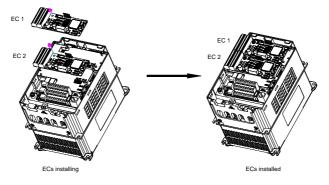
5.5 kW and lower VFD models with extension cards installed
